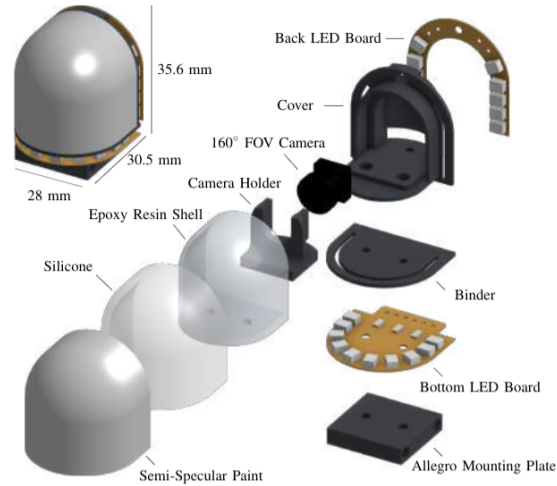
CAD model of the sensor illustrating the assembled finger, along with the exploded view of the sensor showing the internal components.
